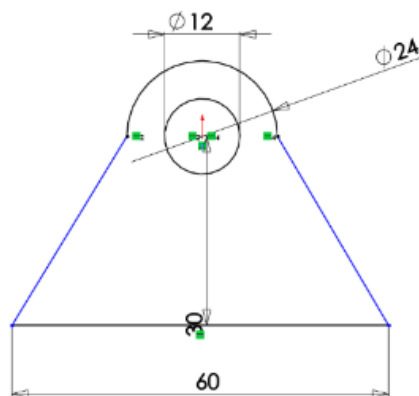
Definition of a fixed link in the construction of the kinematic scheme of the mechanism.
